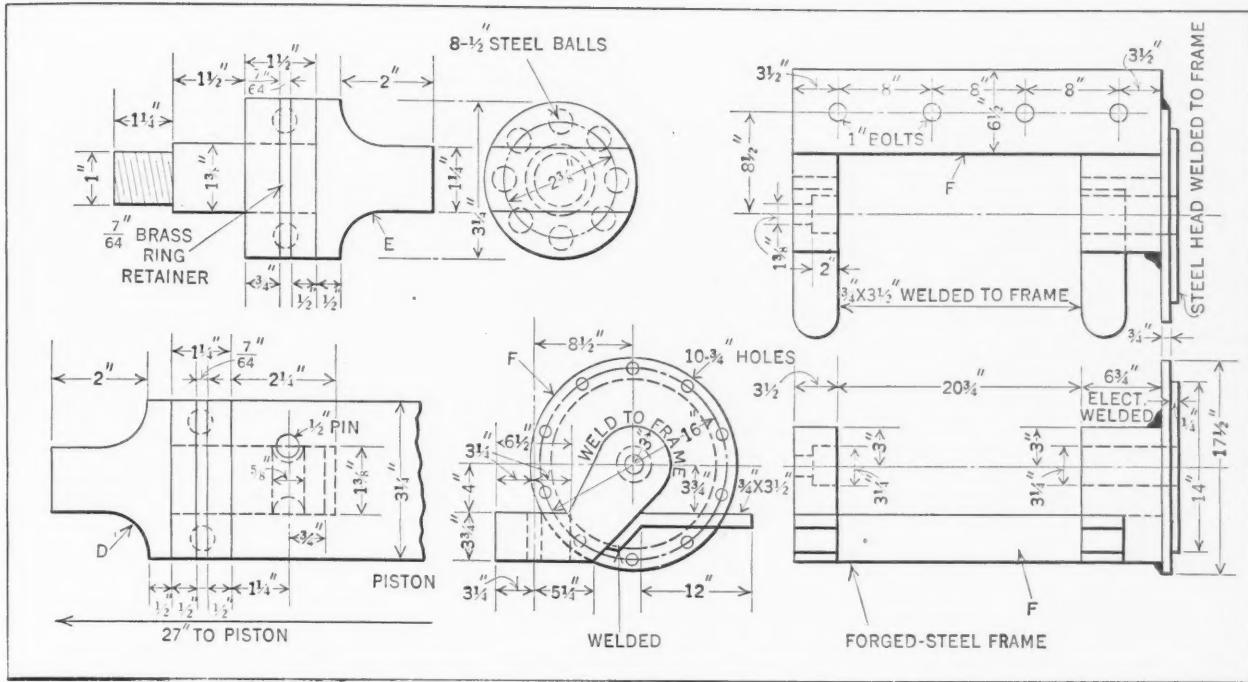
Details of Parts for Machine Shown in Fig. 1 (Parts D and E Shown to Larger Scale than Part F)
